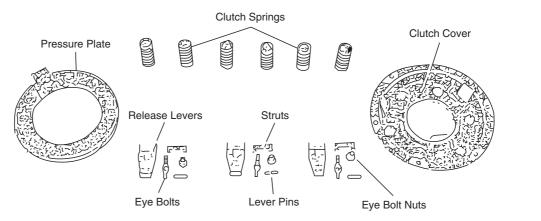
Clutch Components (Courtesy: The Premier Automobile Ltd.)
